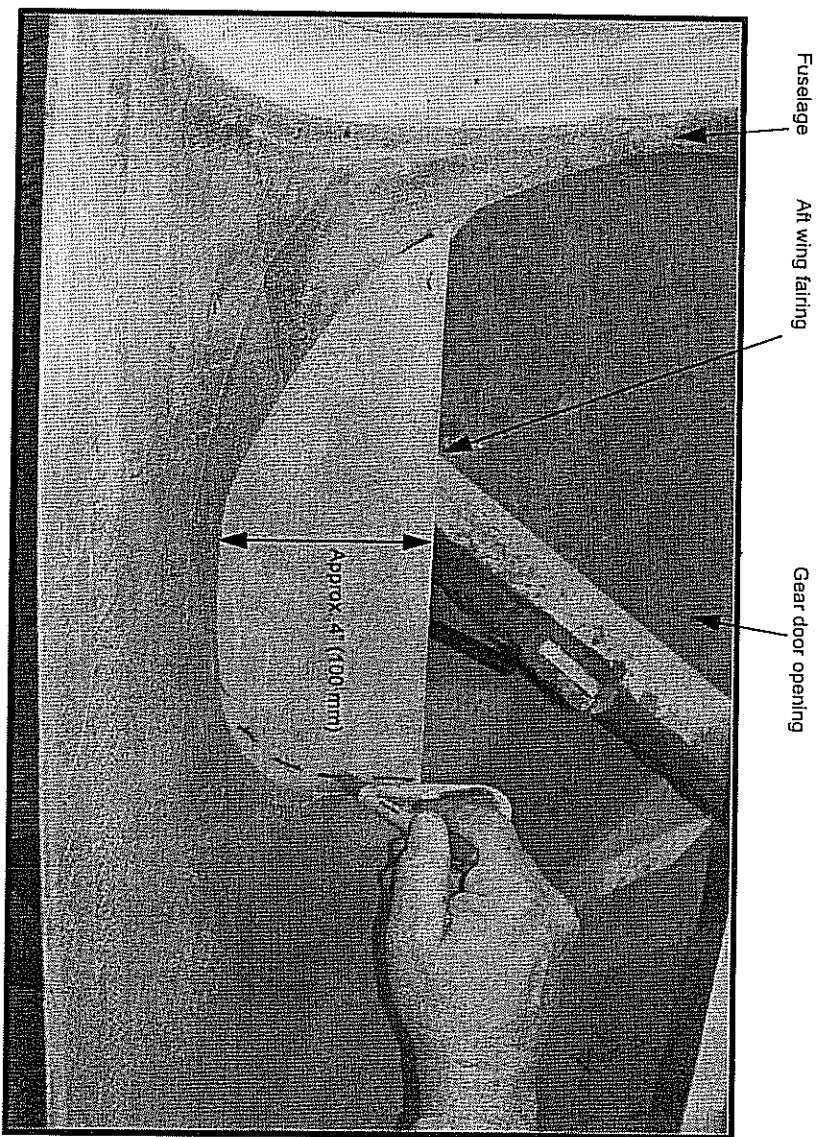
A.2 Main gear door and the completed opening for the main gear door
